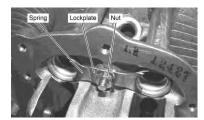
Shroud Tube Spring, Lockplate, and Nut
